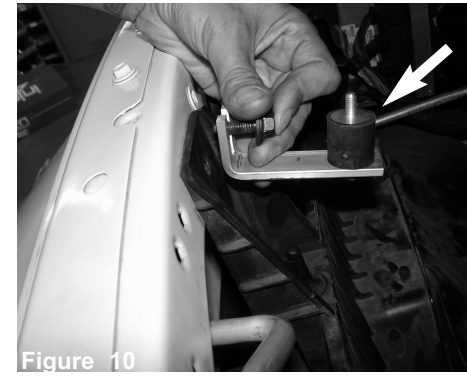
Install the bracket p/n: x-20091 to the spot where the bolt was removed and reuse the bolt removed from figure 8 to secure the bracket to the fender well. Install the vibramount, nut and washer to the bracket.
